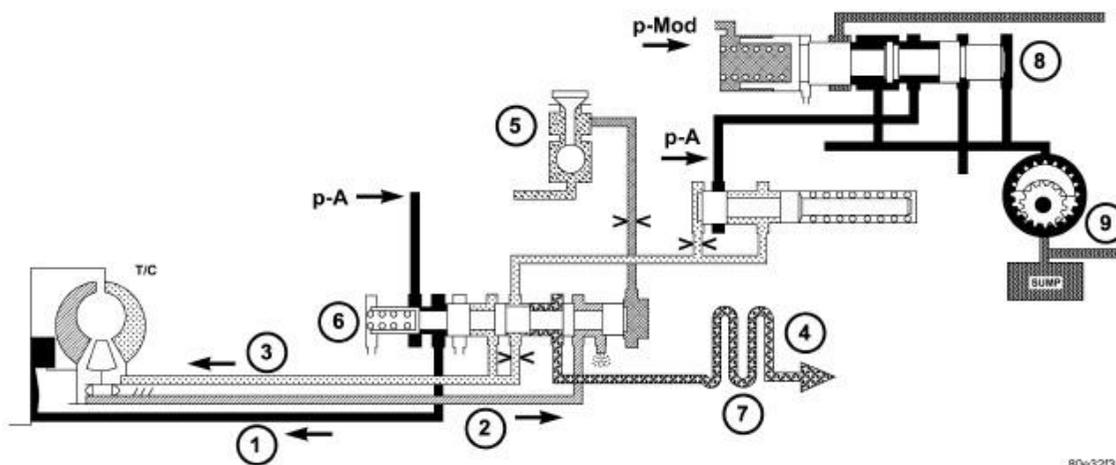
Torque Converter Lockup Clutch Regulating Valve
